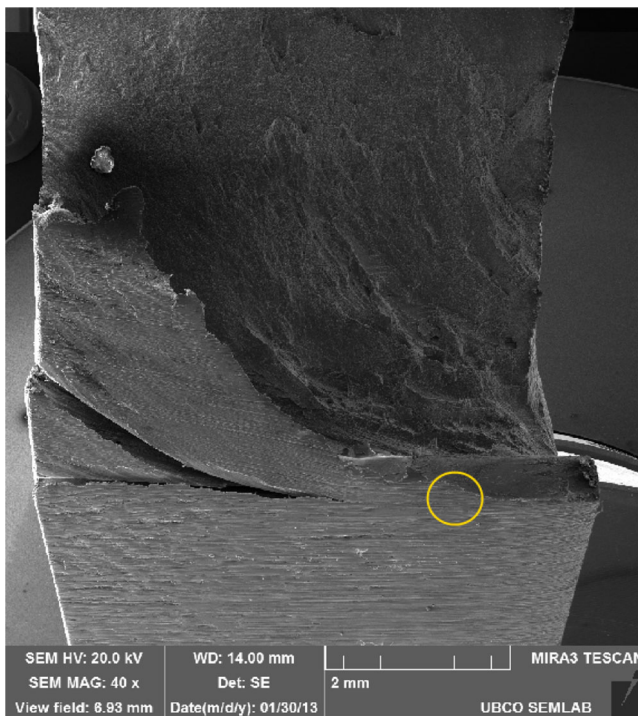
Delamination in the material under the tool pin in sample 3n or hot weld ($\times 40$)
